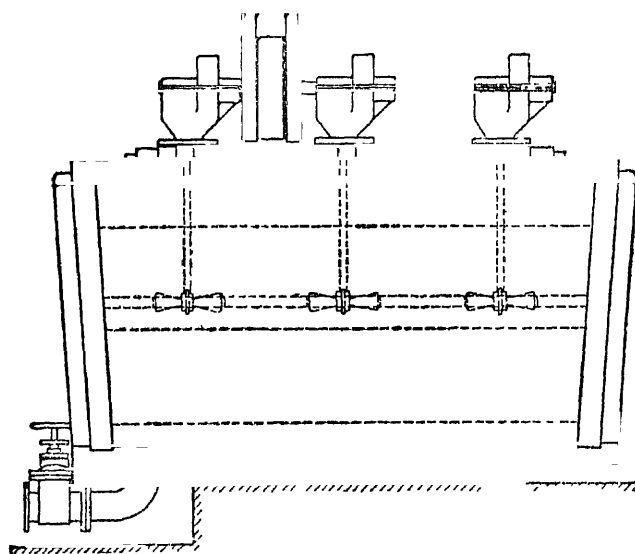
B.—END VIEW OF MACHINE FOR DYEING
